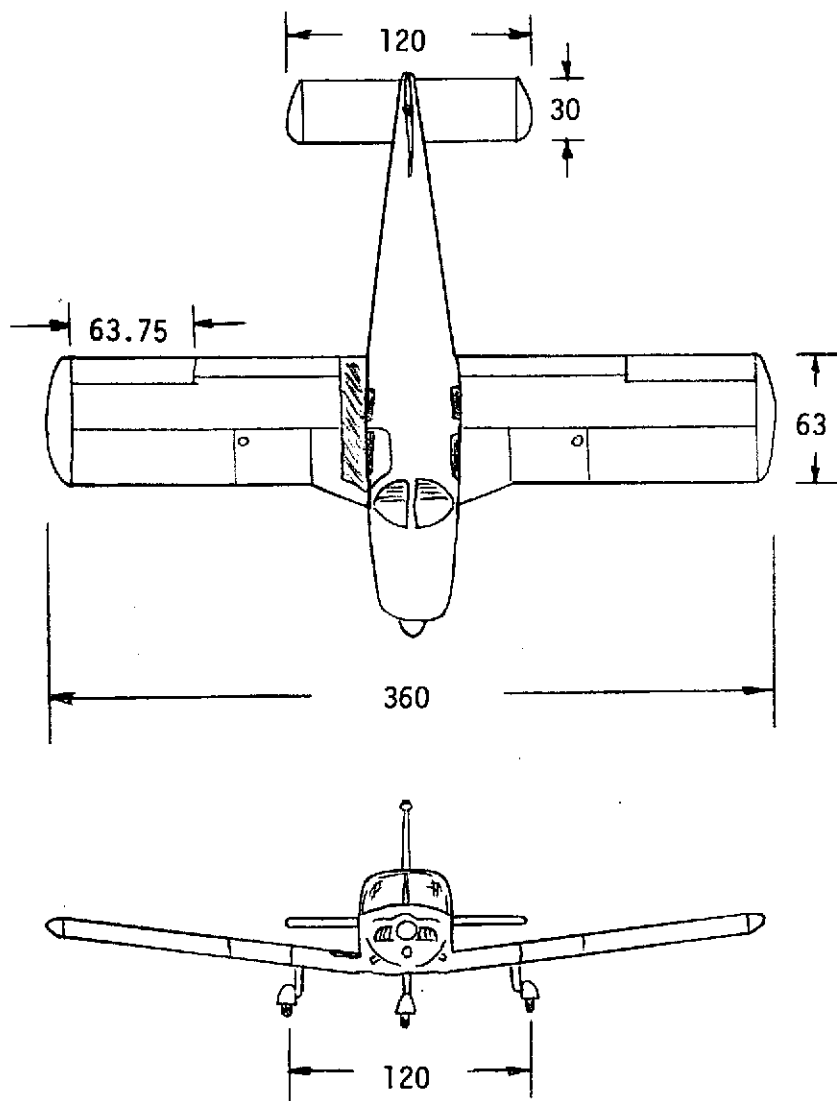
Drawing of the Piper PA-28 test probe aircraft. (All dimensions are in inches.)
